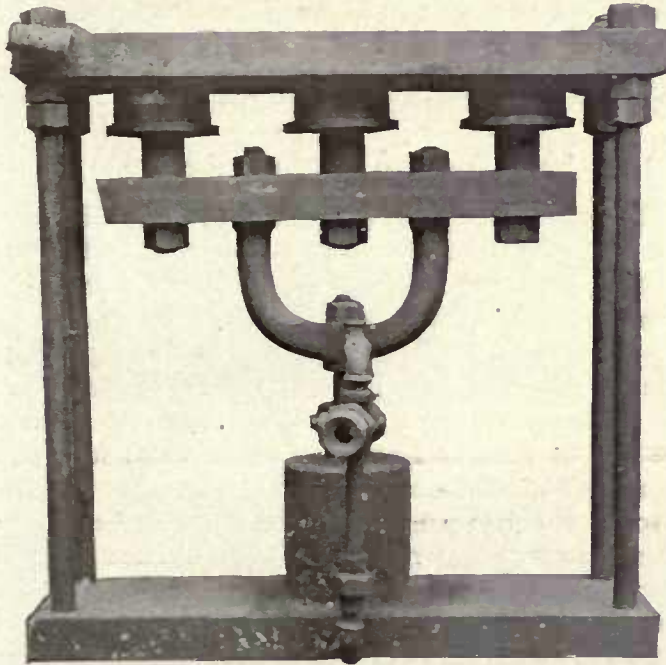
Molding Machine for Piston Rod Packing Rings.
